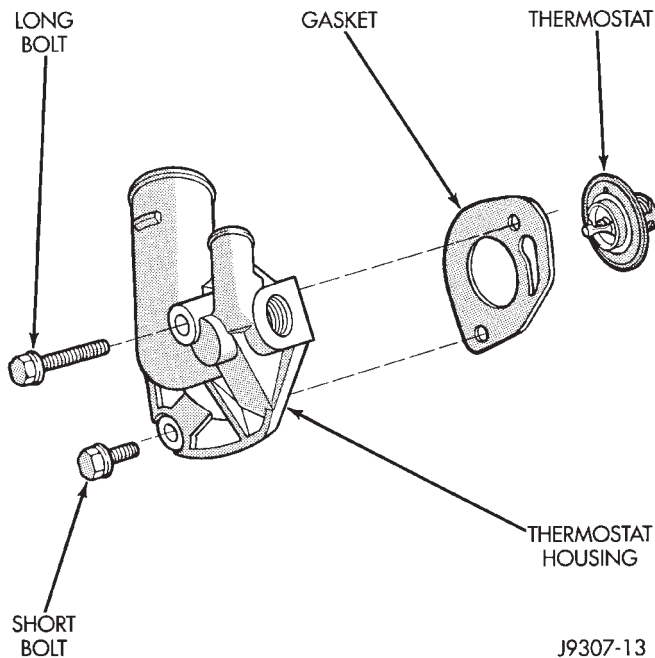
Thermostat Removal/Installation—4.0L Engine
